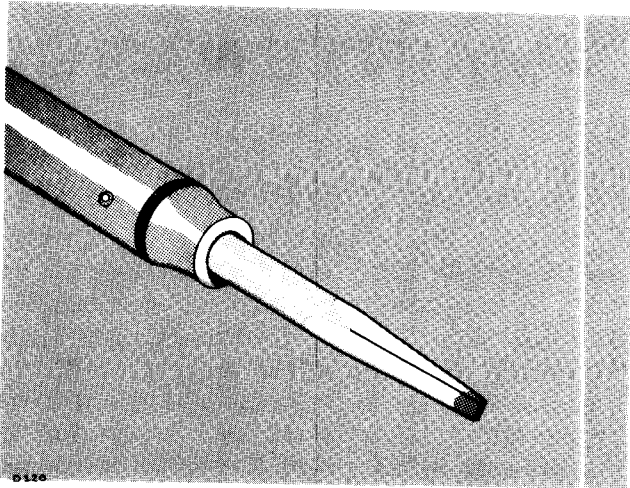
Soldering iron tip properly shaped and tinned.
